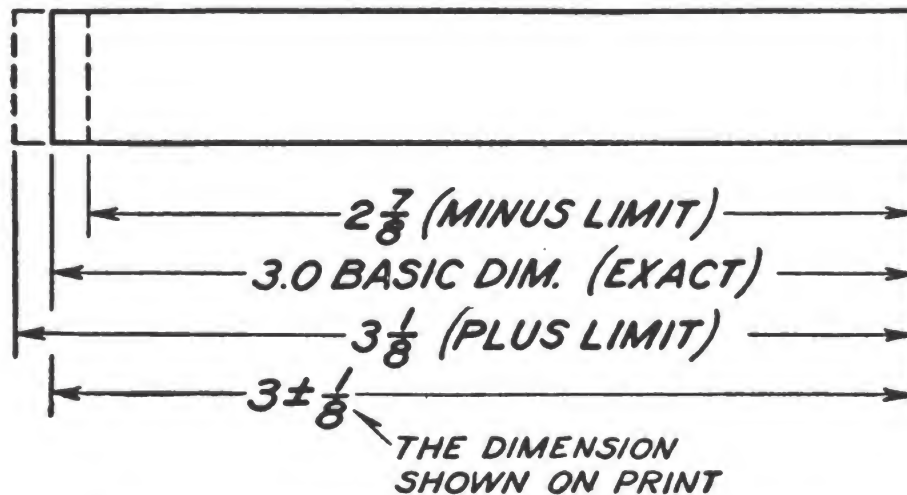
Basic dimension, limits, and tolerances.
